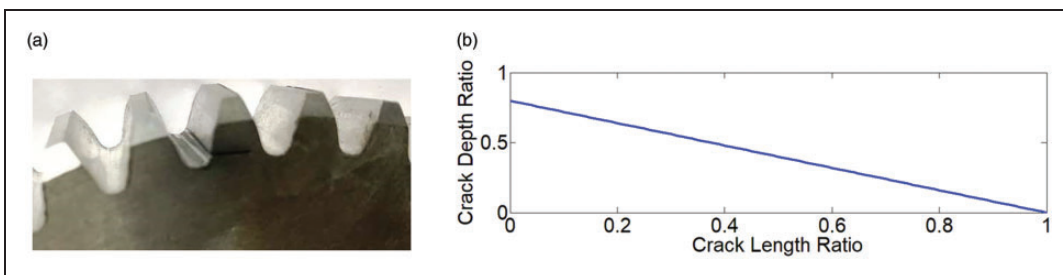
(a) Tooth root crack generated by a wire-cut machine; (b) crack path in tooth length and thickness plane.
